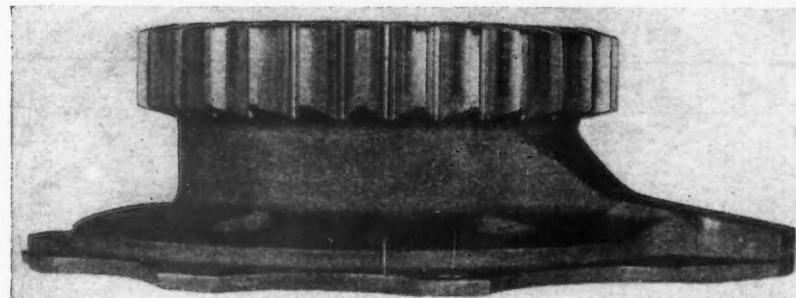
The teeth of this nitrallyo sun gear are shaved with a slight taper to obtain proper tooth bearing under load. This shaving job is still in the experimental stage.
